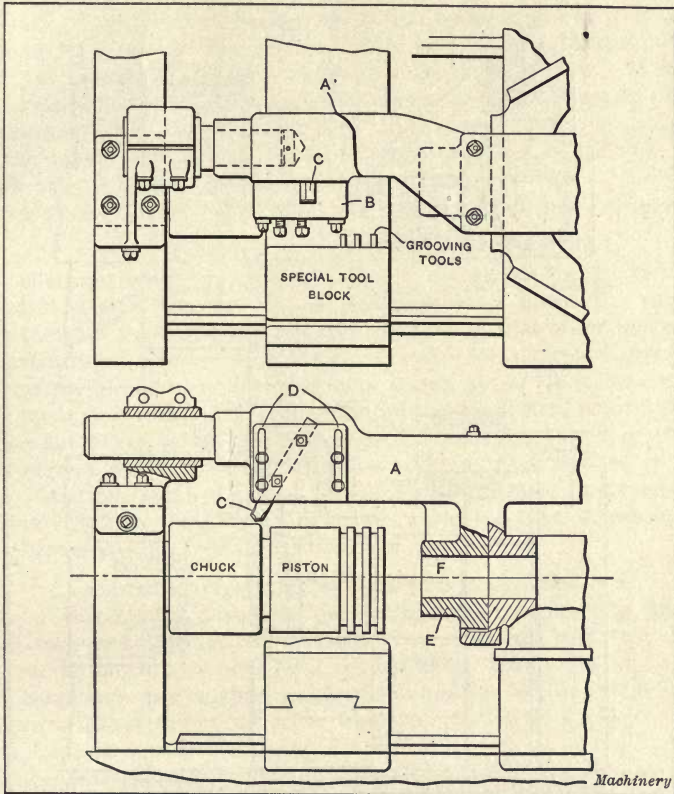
Piston Turning Tool having Adjustable Tool-block
